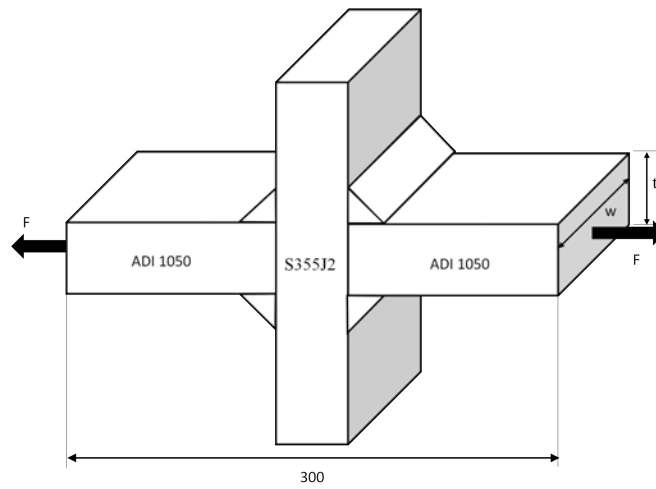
Geometry of the cruciform load-carrying fillet welded joints under axial load
